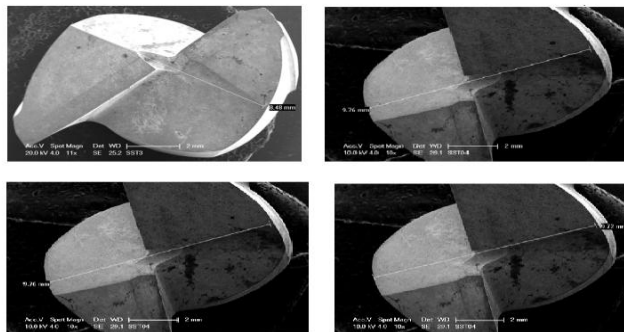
The measurement of a tool wear of a two flute tungsten carbide end mill for machining of Titanium alloy Ti-6Al-4V
